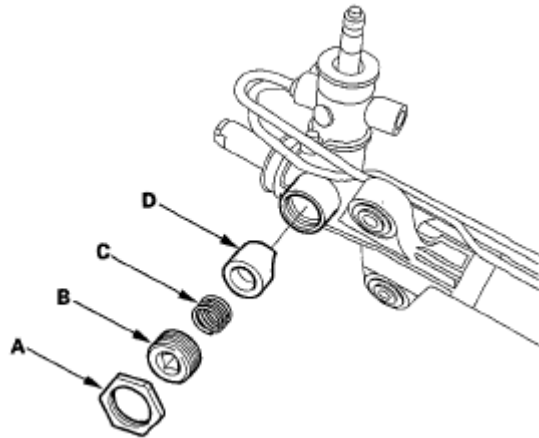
Identifying Spring, Rack Guide, Gearbox Housing, Locknut And Rack Guide Screw
